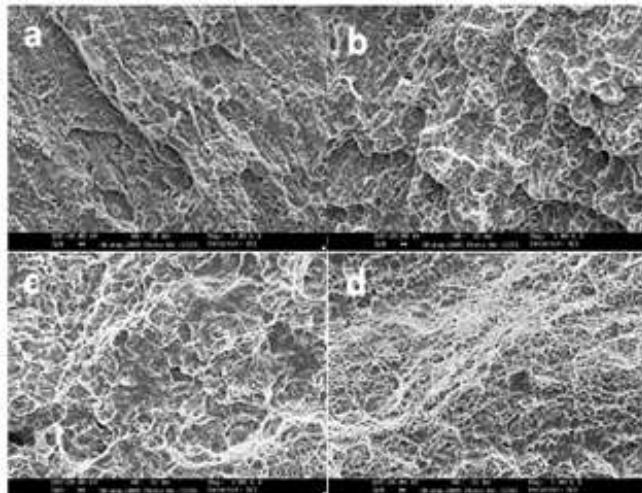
Fracture features of impact samples of friction welds in various heat treated conditions (a) as-weld (b) HT/ T400 (c) HT/T600 (d) HT/ T(670+600)
